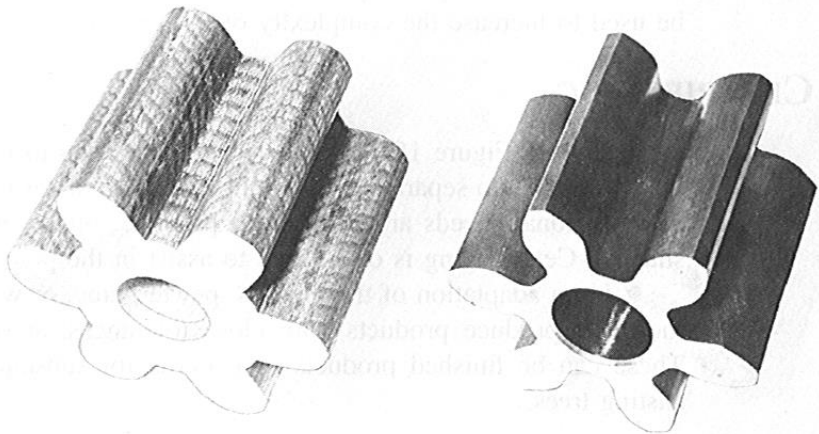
Gear produced by continuous casting. (Left) As-cast material; (right) after machining. (Courtesy of American Smelting and Refining Company.)
